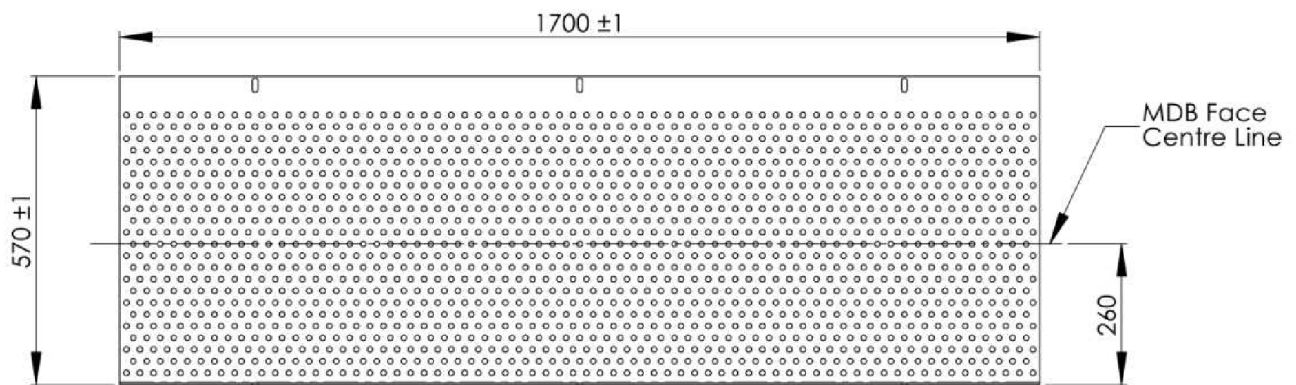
Back Plate Ventilation and Front Plate of Trolley Attachment
